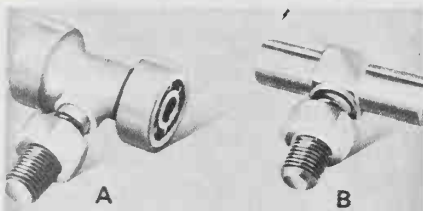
Fulcrum bearing is fitted so bearing center line is approximately 0.750 inch from crankcase surface. Bearing (A) is used on 3 cylinder engines; (B) is used on one and two cylinder engines.
